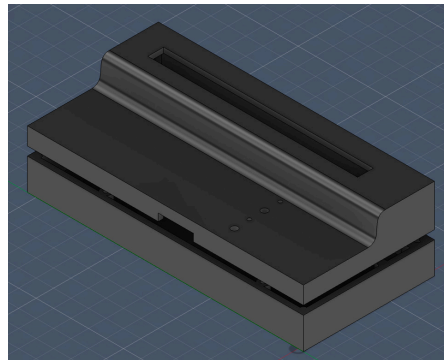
Fusion CAD Model of 3D Printed Fader Enclosure
